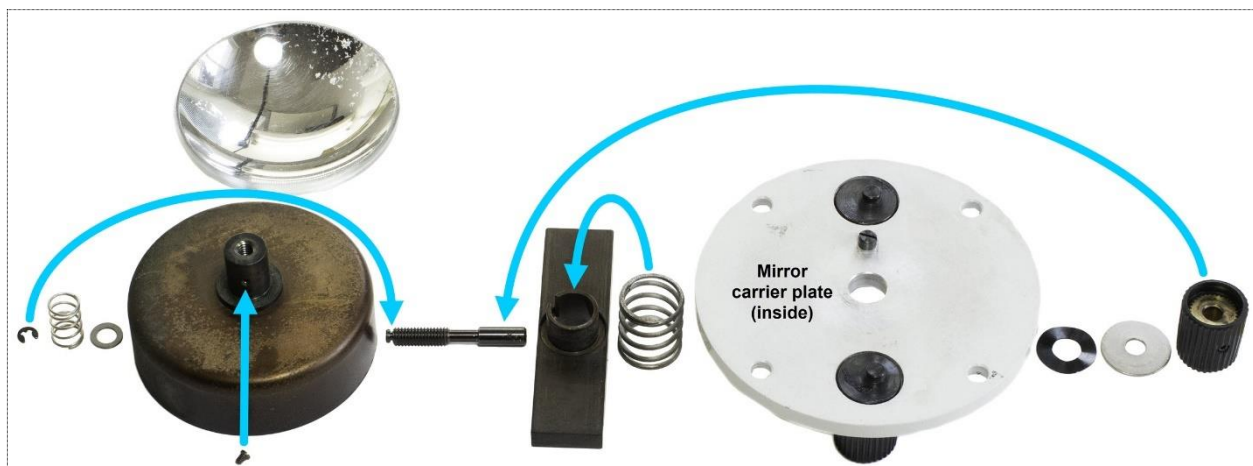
The mirror carrier plate with the disassembled mirror focus mechanism. The parts are (from left to right):
